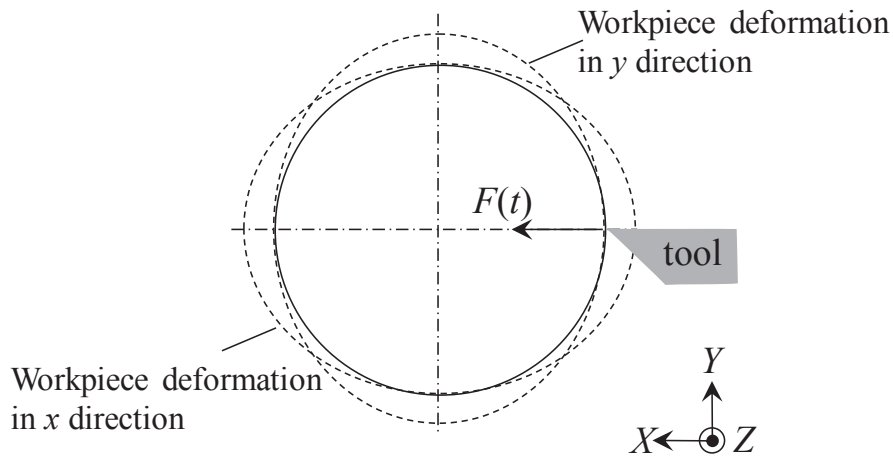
Deformation of thin-tubular workpiece caused by cutting force.
